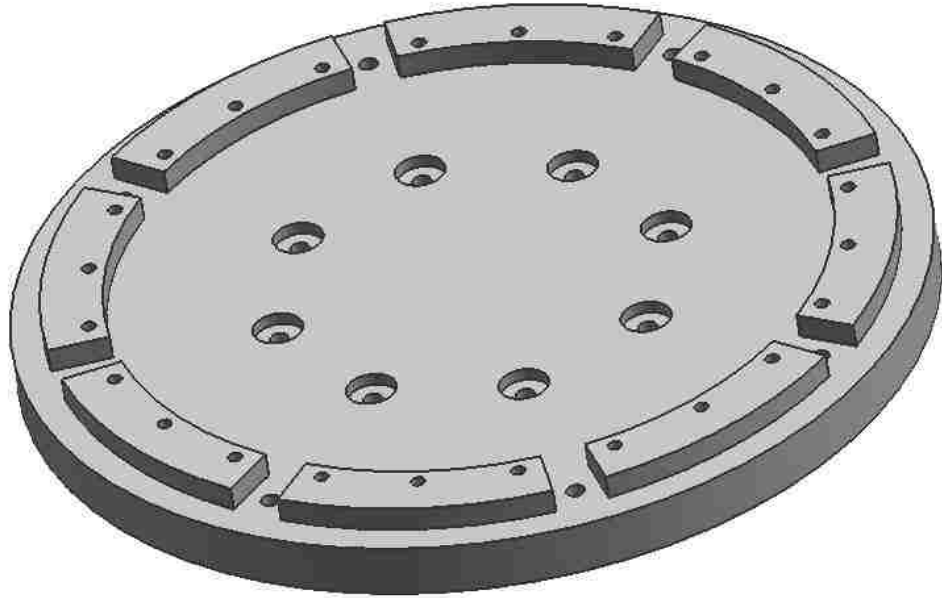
Isometric View of MR SAT Shaker Mounting Fixture
